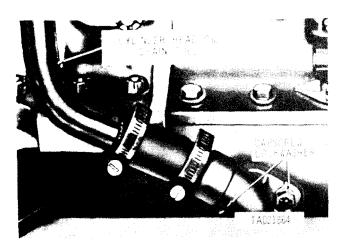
Disconnecting or connecting left front cylinder head oil drain tube.
